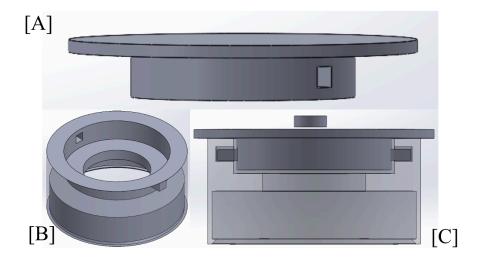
CAD designs for the top (A) and bottom (B) half, as well as a subassembly design (C) showing the joining of the two pieces via magnets. This new design features the same snap-on mechanism, a hole for medication, and new square magnet tunnels to fit the stronger magnets.
